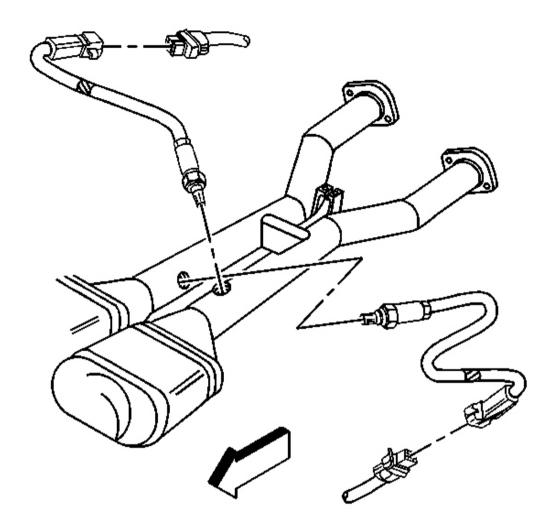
CPA Locks & Oxygen Sensor Electrical Connectors Courtesy of GENERAL MOTORS CORP.
